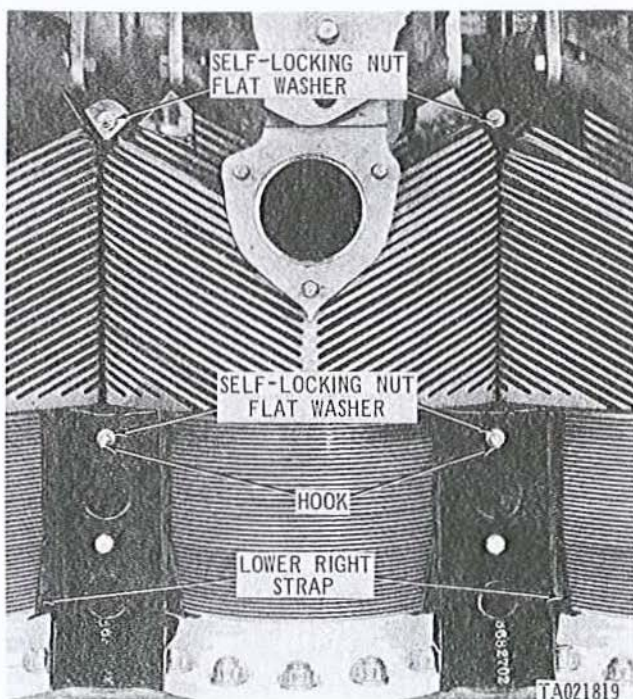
Removing or installing intercyylinder head deflectors and disconnecting intercyylinder deflector hooks - right side.
